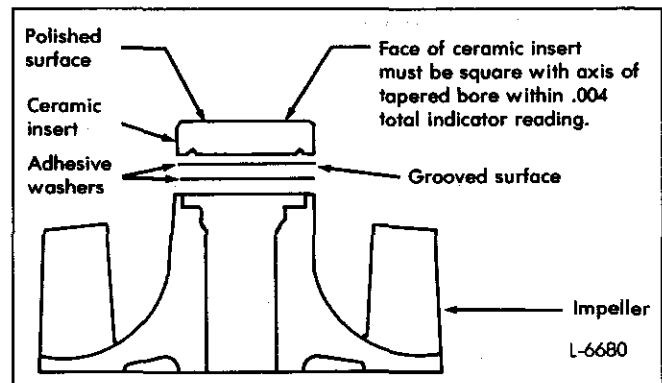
Insert, Adhesive Washer, Impeller Stackup
